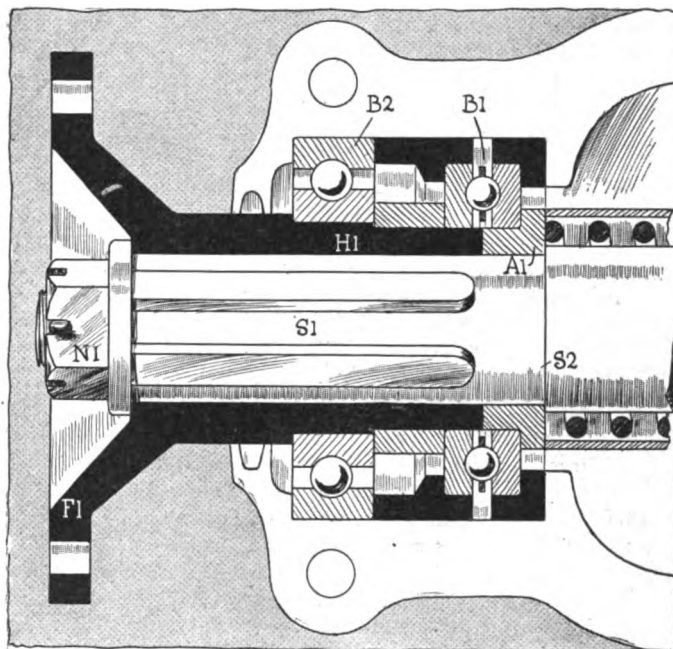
Flanged coupling of gearset shaft in 18-horsepower Panhard. The motor or clutch shaft carries a similar corresponding flange
